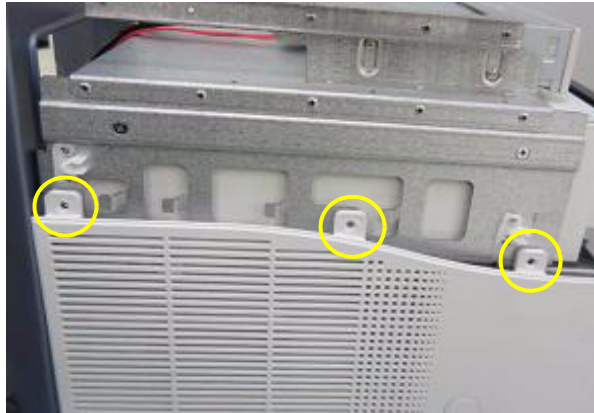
Unscrew 3 screws to remove SIDE COVER L ASSY
